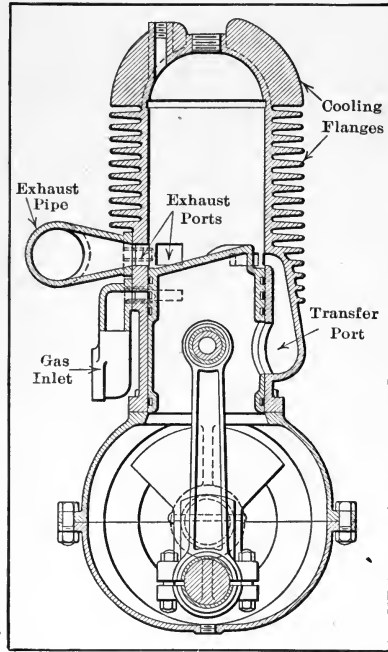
Sectional View of Chase Two-Cycle Engine, a Two-Stroke Form Successfully Cooled by Air Flanges Cast Integral with Cylinder.
